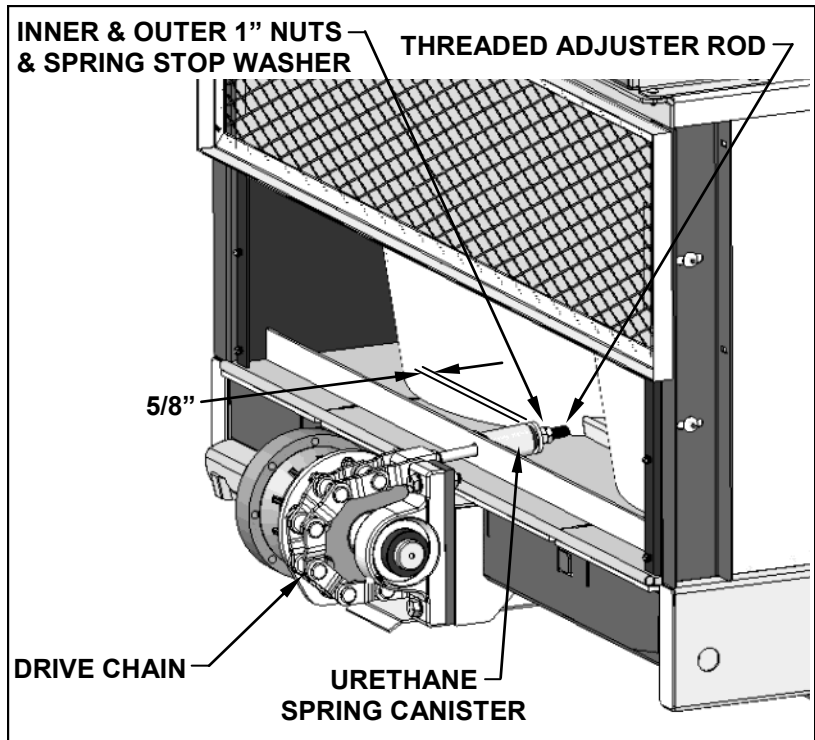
URETHANE SPRING CHAIN ADJUSTER
